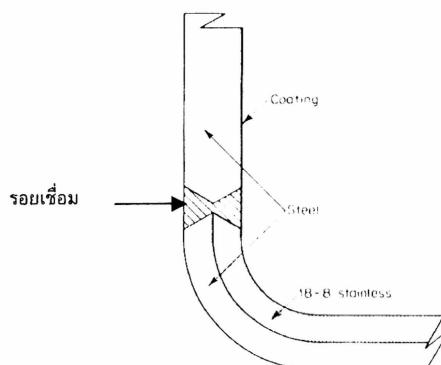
Detail of welded steel and stainless clad tank construction.
